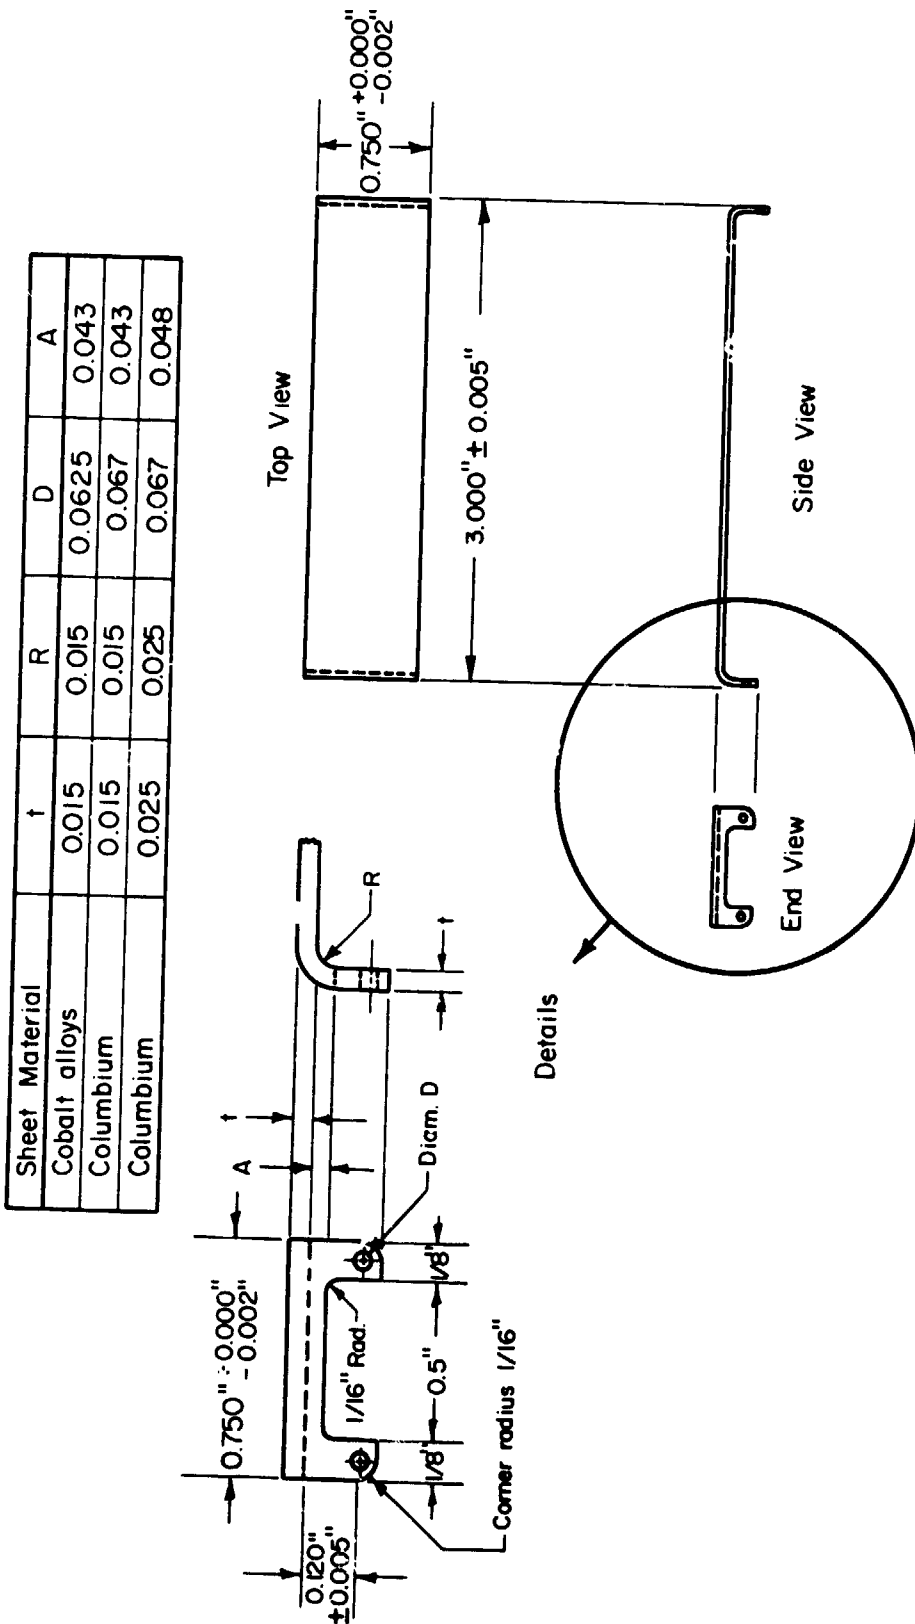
DESIGN DETAILS OF PLASMA-ARC TEST SPECIMENS
